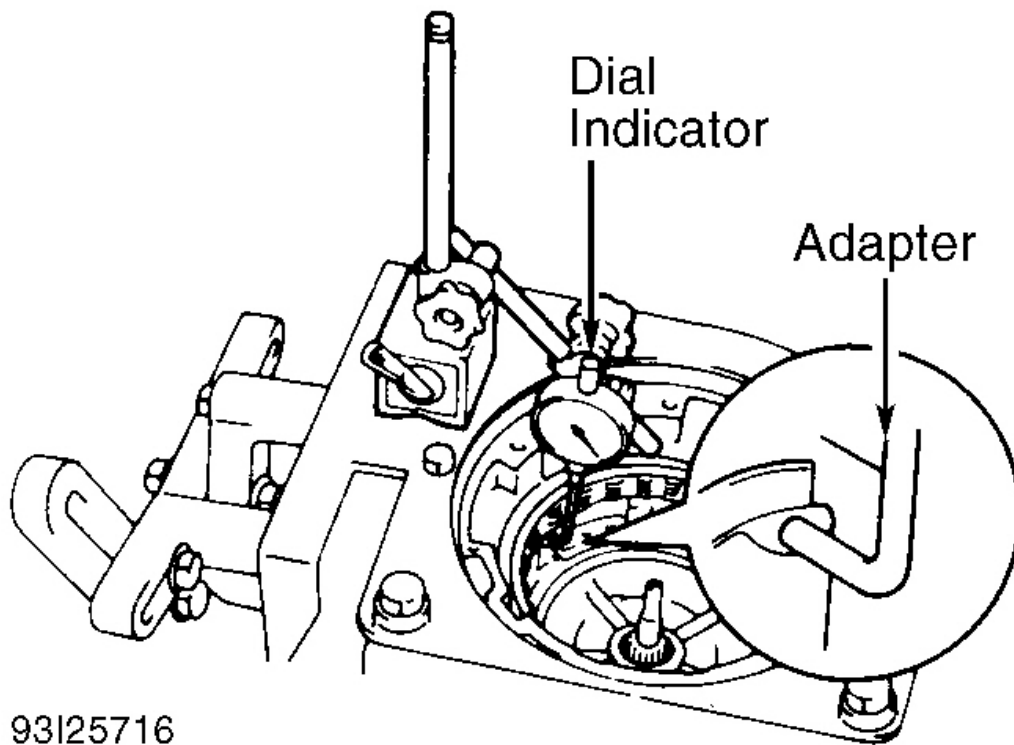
Measuring Overdrive Brake Piston Stroke (1 Of 2)
